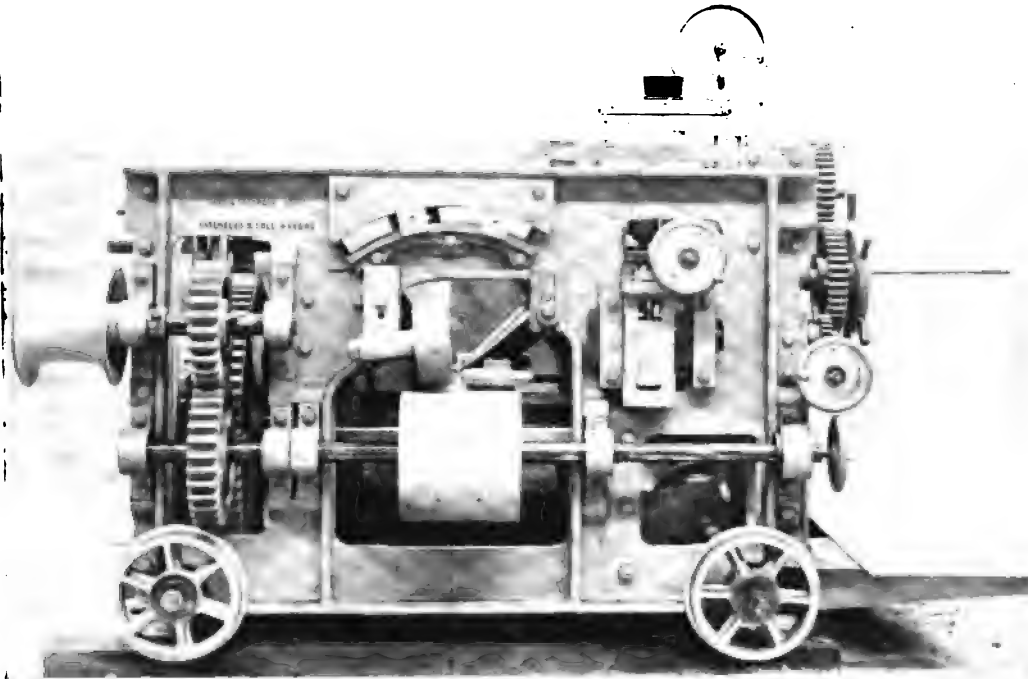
BEVELLING MACHINE FOR ANGLES, AND OTHER SECTIONS, UP TO 9 IN. WIDTH OF FLANGE.
